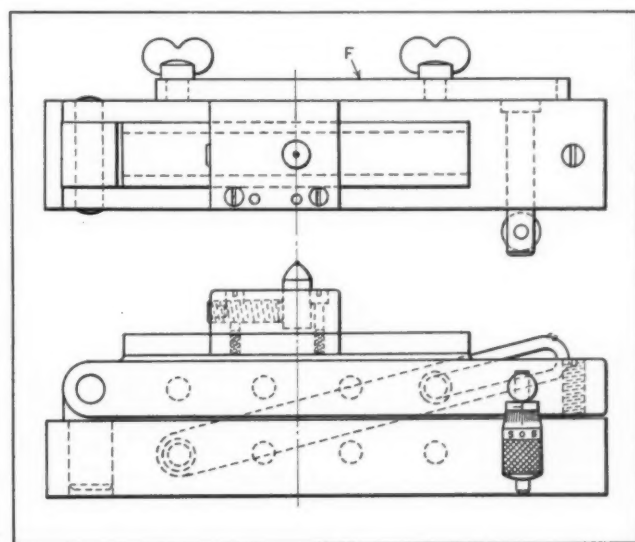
Wheel-truing Fixture with Sine Bar Arrangement for Making Accurate Angular Settings
